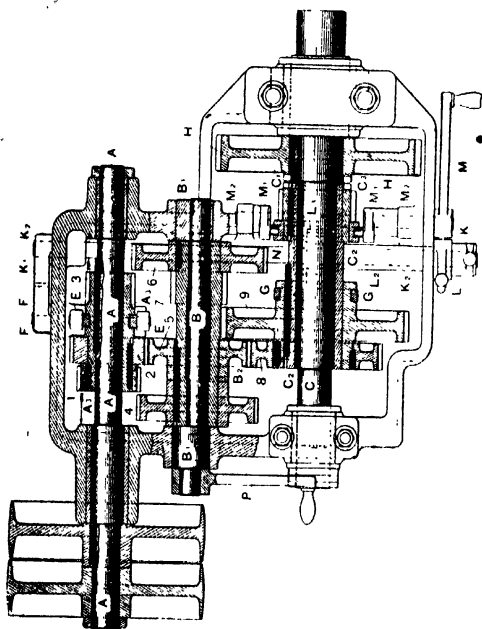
Tangye's headstock. Sliding gears and clutches.
